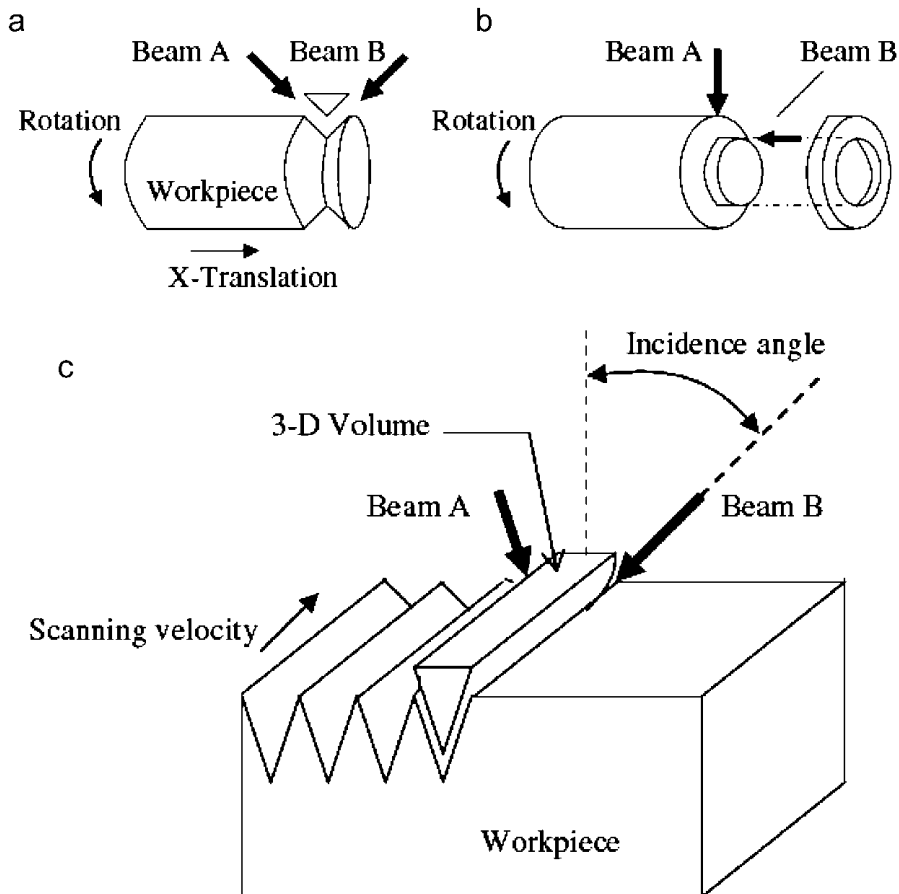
Three-dimensional laser machining: (a) laser turning (helix removal); (b) laser turning (ring removal); and (c) laser milling [1].
